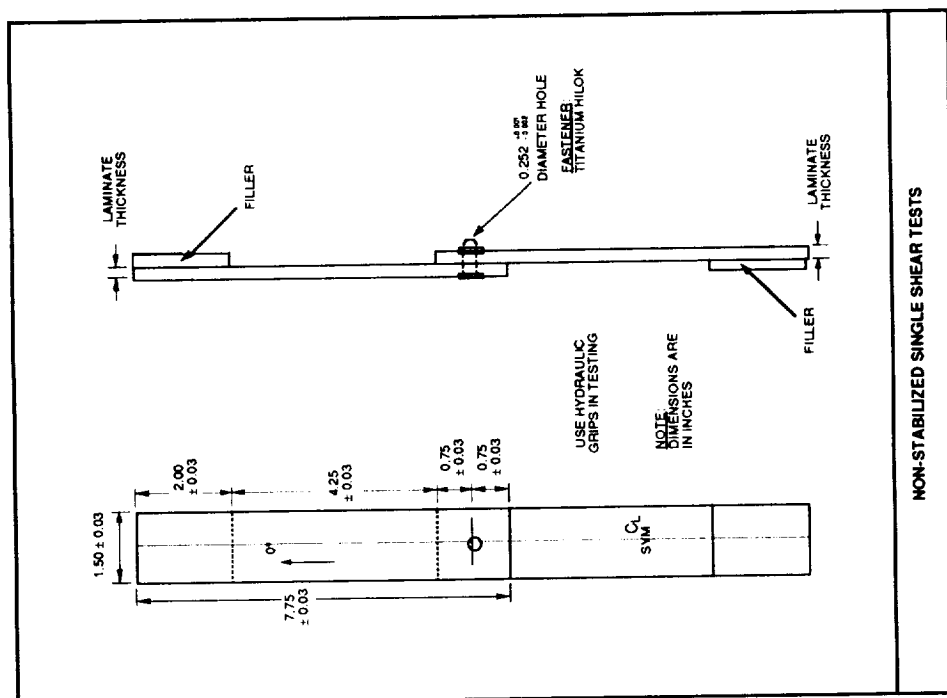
Baseline Dimensions for Unstabilized Single-Shear Specimen.
